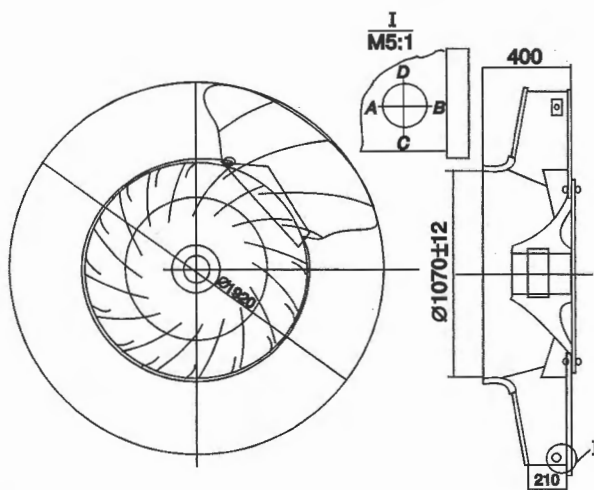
Mill exhauster fan impeller with samples mounted in the blades (AB, CD are the directions along which the profile of their worn surface was taken)
